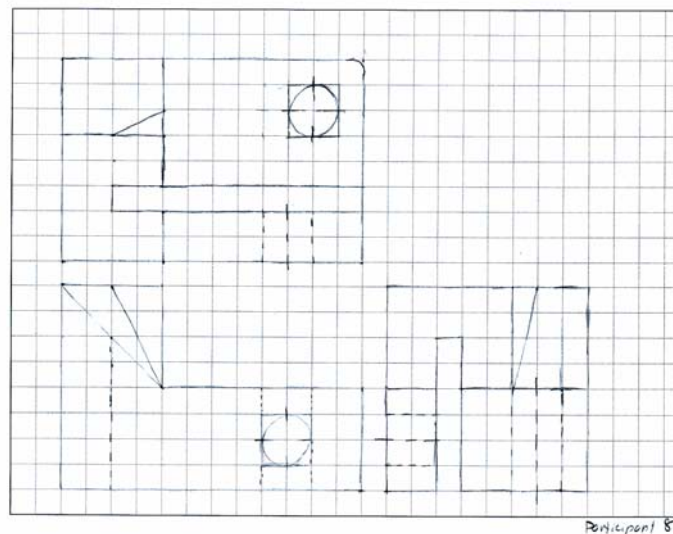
P08 solved problem 1 correctly except for the misaligned holes in the front view and a missing line in the right side view.
